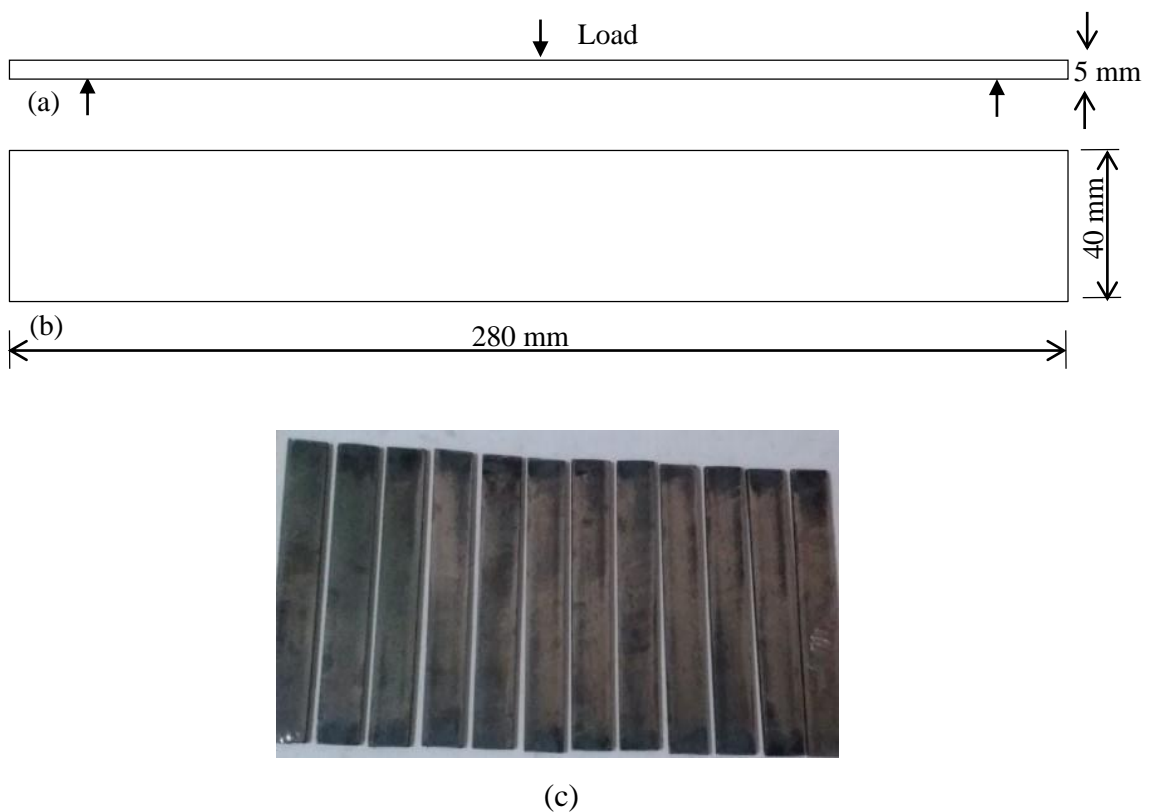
Schematic diagram (a) elevation (b) Plane view
